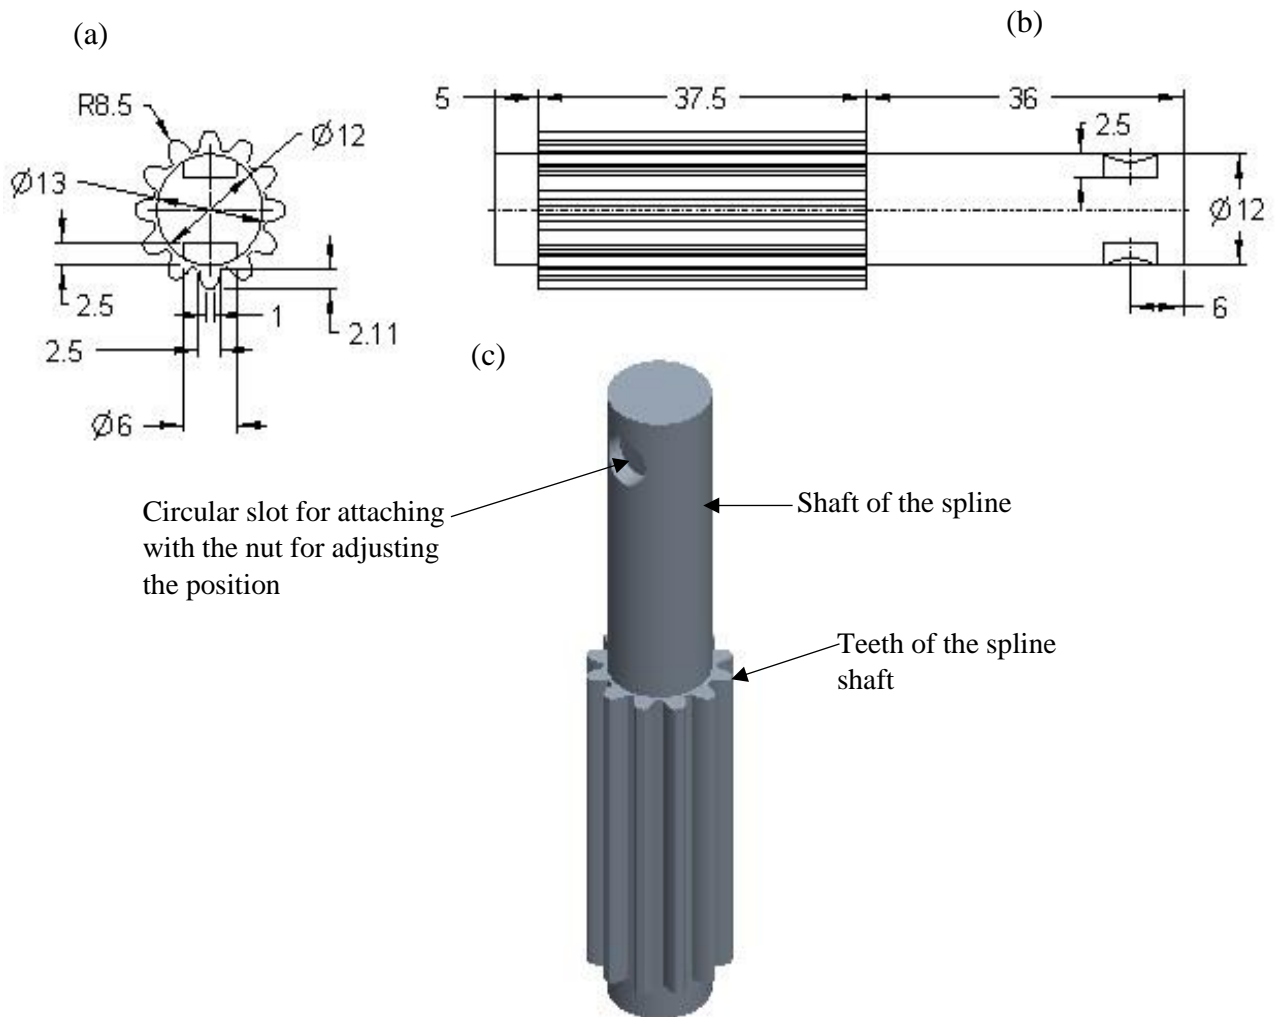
(a) Top view, (b) side view, and (c) 3-D view of the CAD model of spline shaft for its fabrication.
